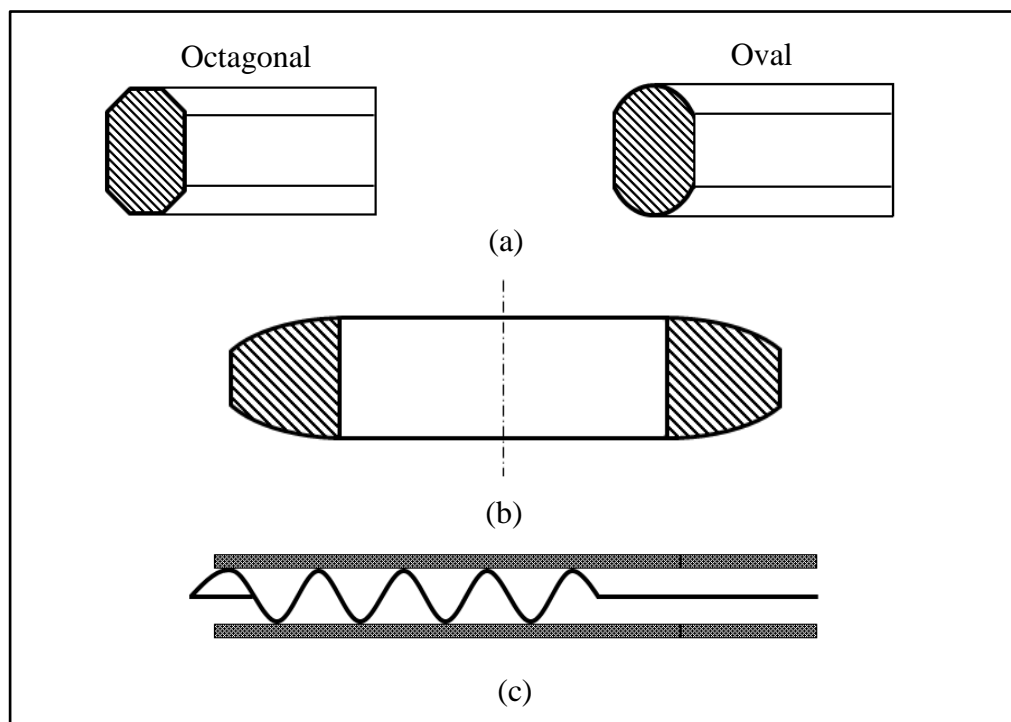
Metallic gaskets (a) Ring joint gasket (b) Lens ring gasket
